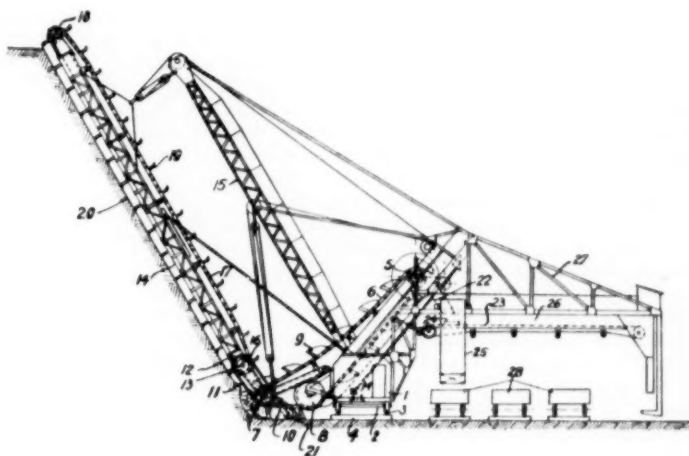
GENERAL ARRANGEMENT OF COAL-CUTTING EXCAVATOR
